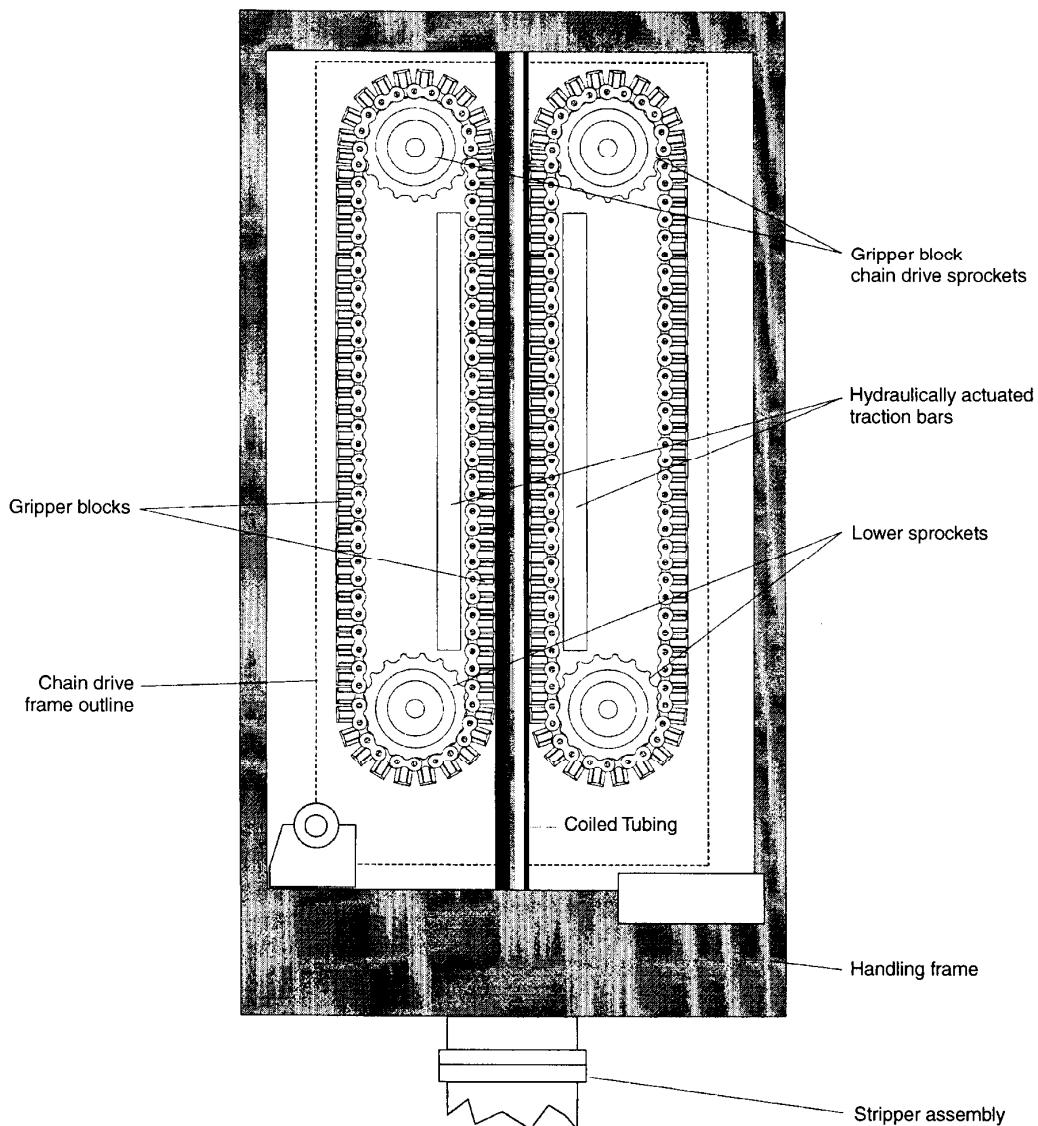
Opposed Counter-Rotating Chain Injector—Cut-Away View
